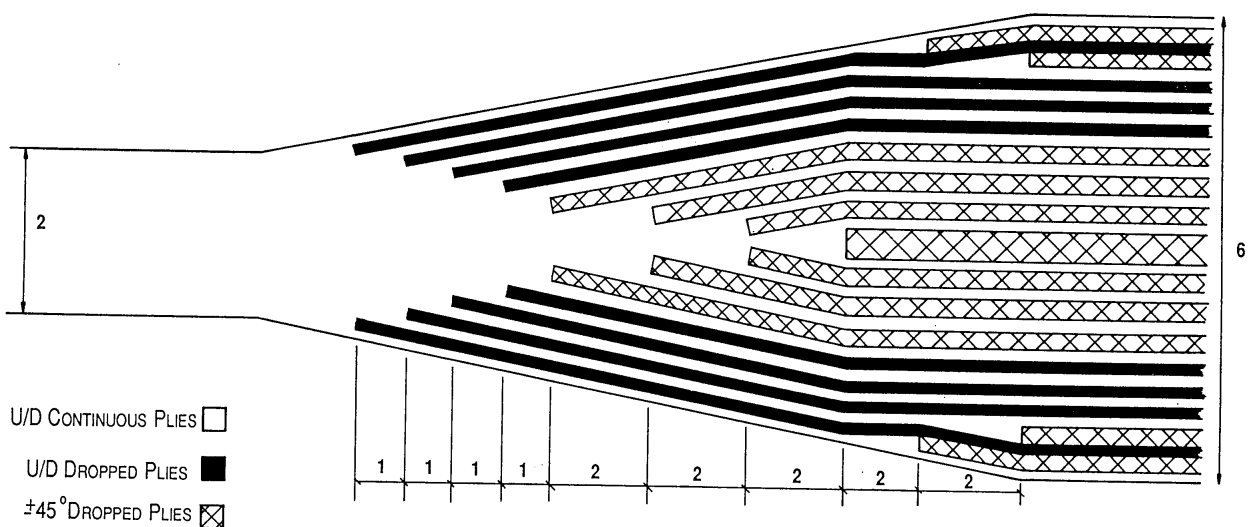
Schematic of layup of redesigned tapered tension specimen (dimensions in mm)
